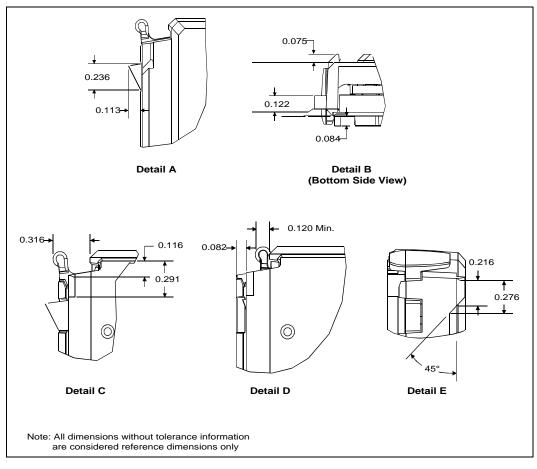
S.E.C.C. Packaged Processor — Latch Arm, Extended Thermal Plate, and Cover Detail Dimensions (Reference Dimensions Only)
